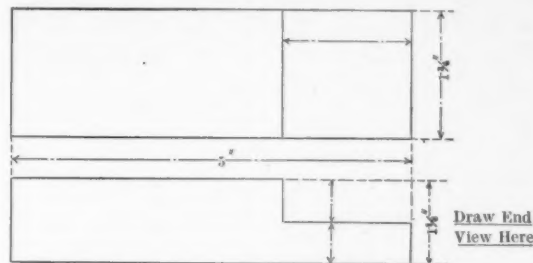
SECOND EXERCISE—A LAP JOINT DETAIL.
